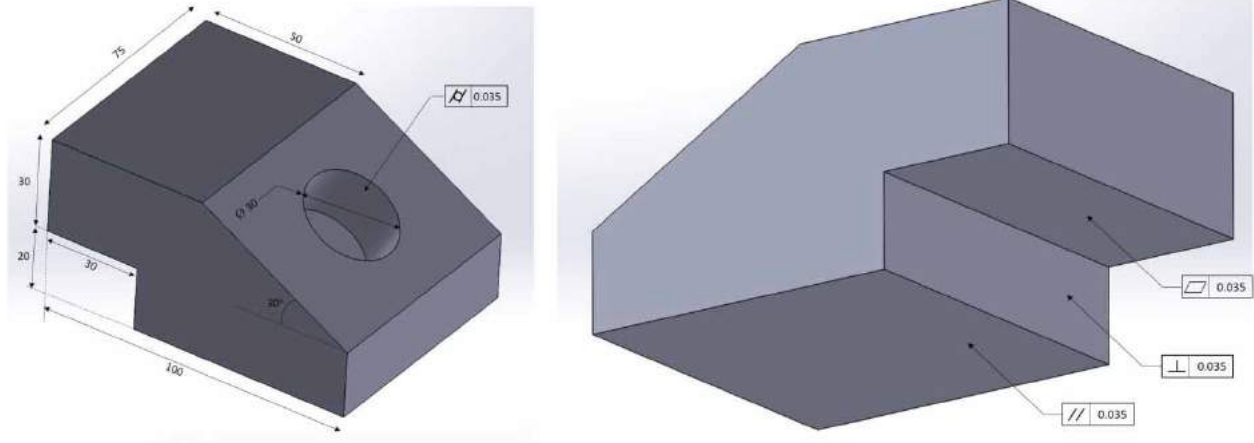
Test part: dimensions and tolerance callouts.
